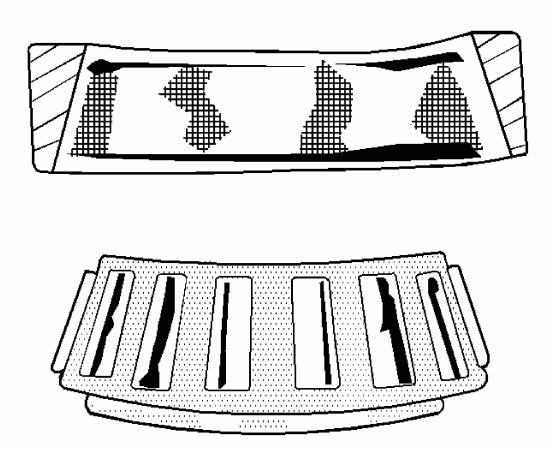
Identifying Misalignment Courtesy of GENERAL MOTORS CORP.
